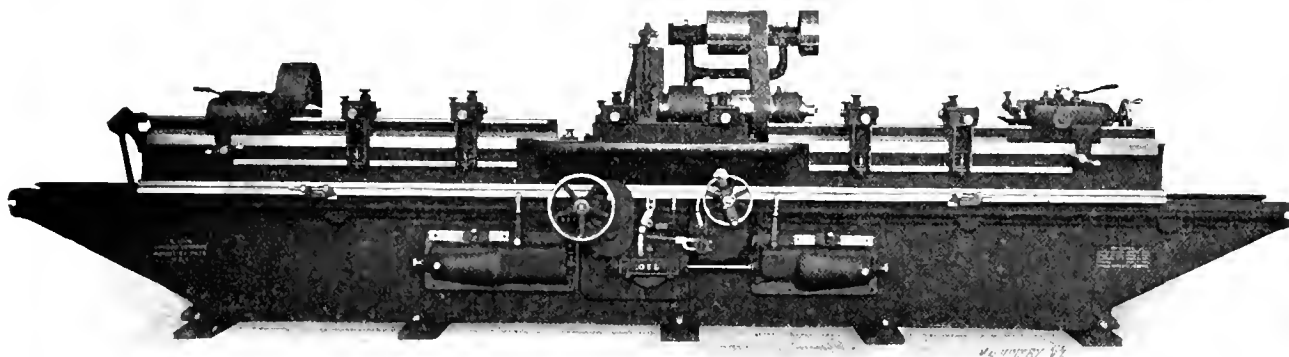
Front View of Norton Self-contained Motor-driven Grinding Machine.
